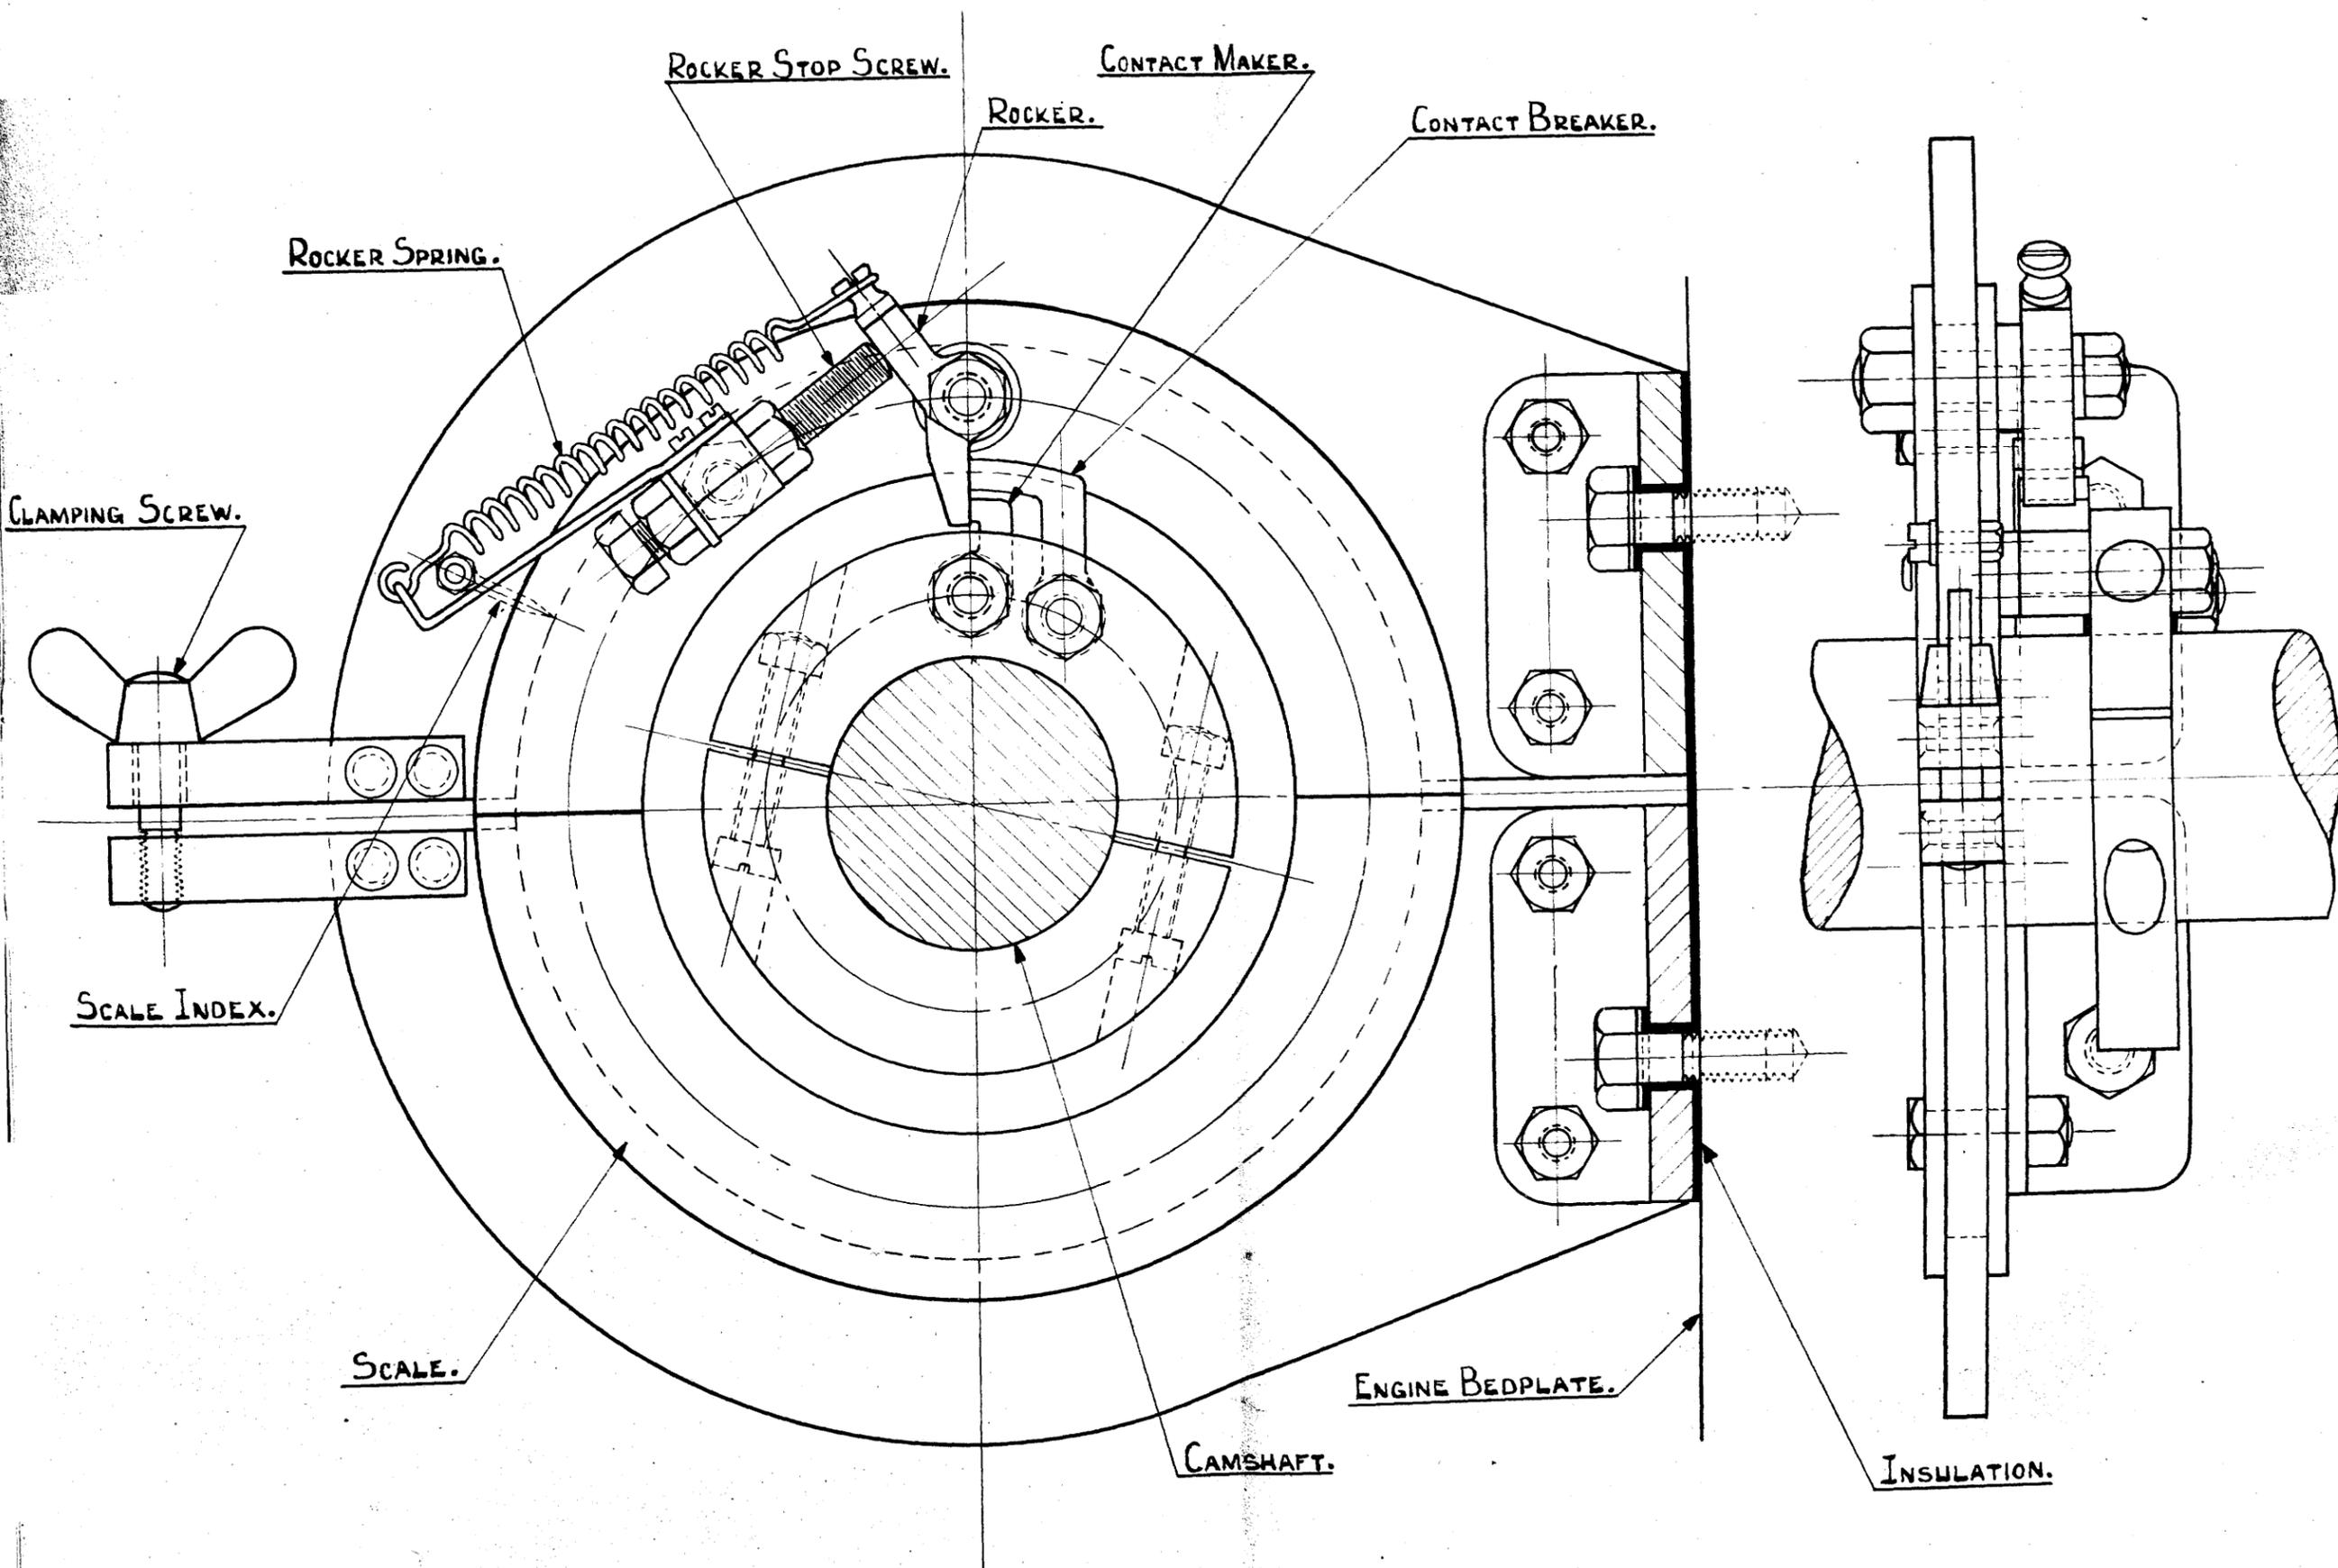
CAMSHAFT ELECTRICAL CONTACT.
